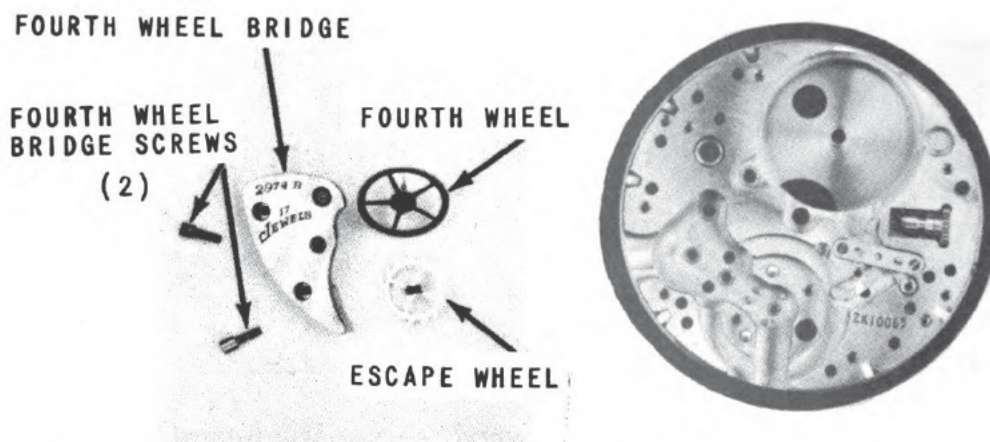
Fourth wheel bridge, fourth wheel and escape wheel removed.
